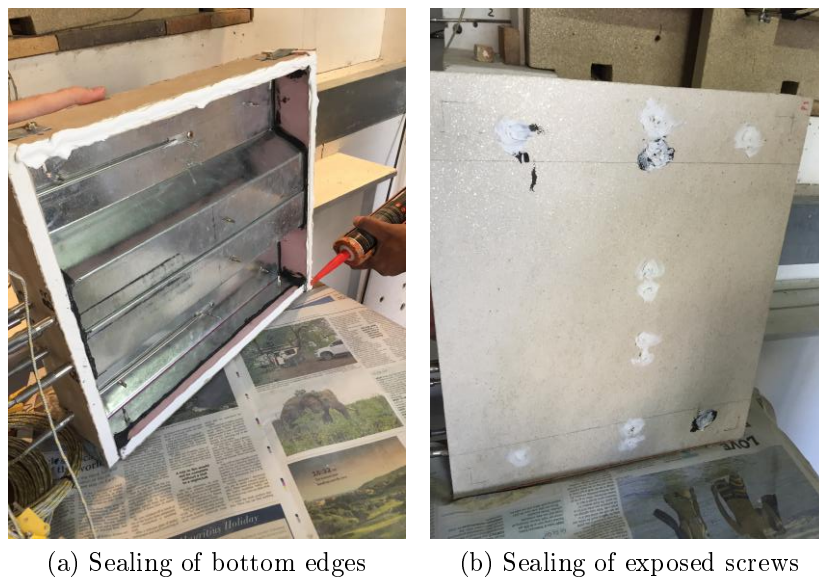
Sealing bottom edges and screw heads of the test specimens
